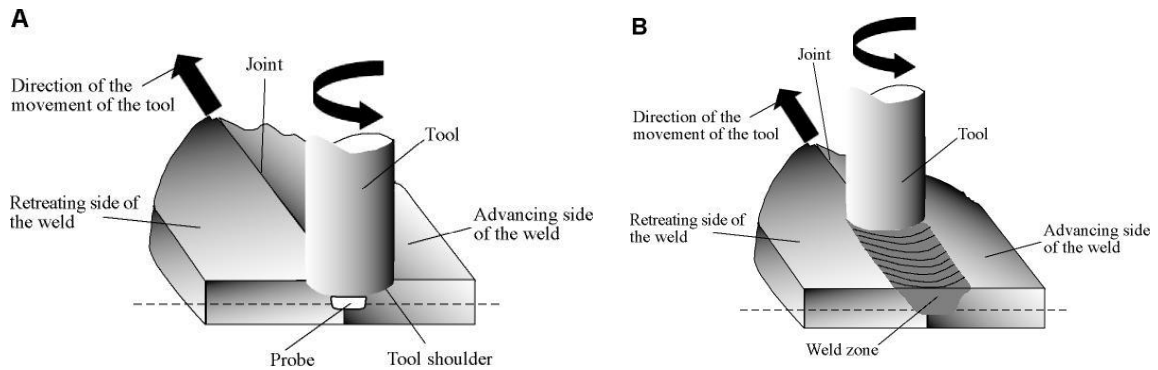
(A) Schematic diagram of the FSW process: (B) The progress of the tool through the joint, also showing the weld zone
